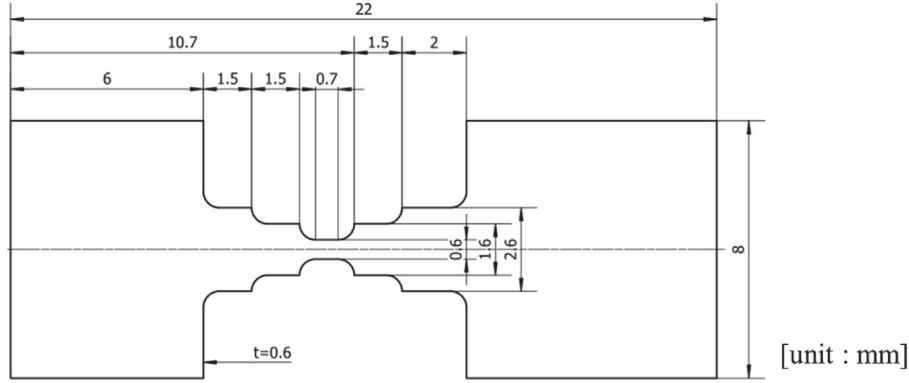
Geometrical dimensions of a tensile sample machined by EDM tested for internal hydrogen embrittlement in a micro tensile machine [62].
